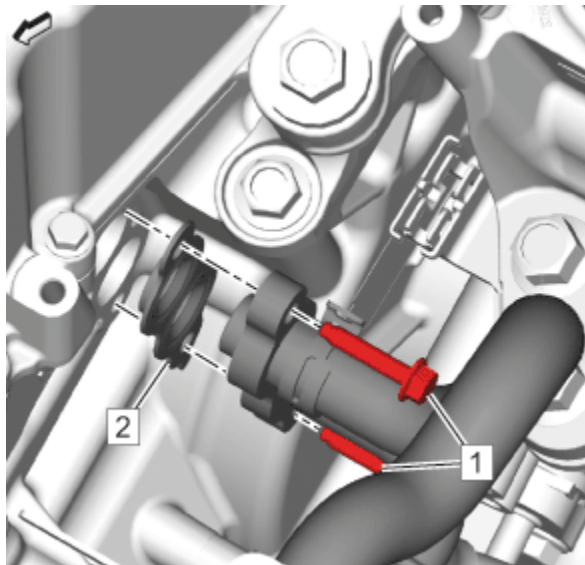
Drive Motor Generator Control Module Cooling Outlet Hose And Bolts
